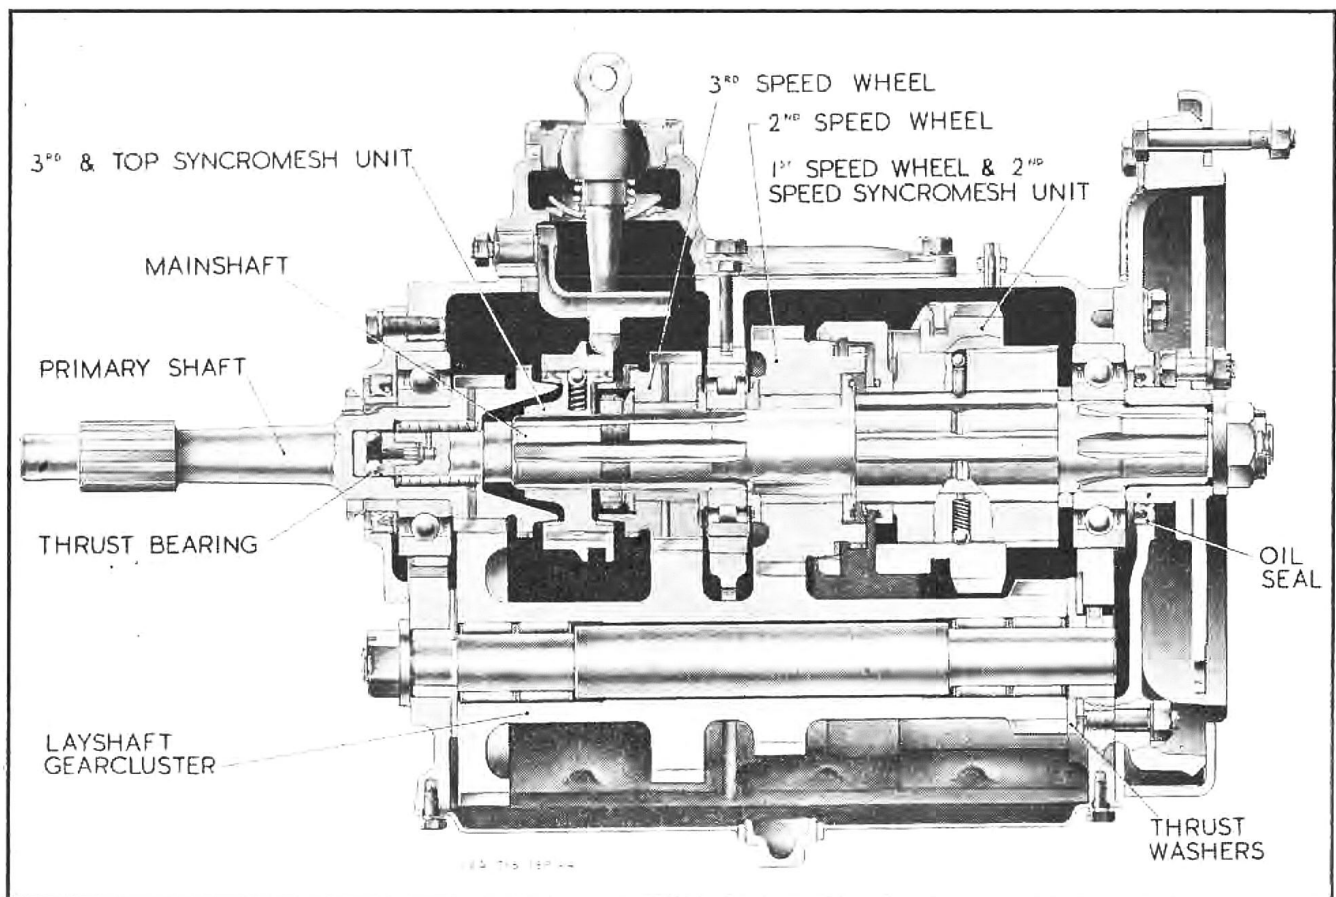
GEARBOX, LONGITUDINAL SECTION.
